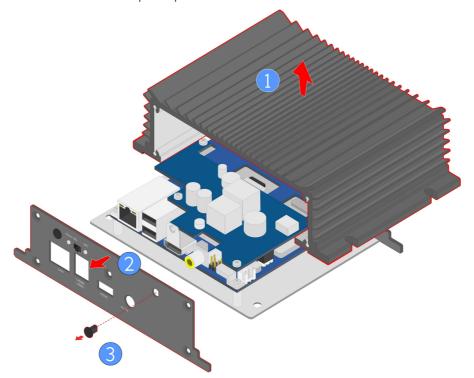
Removing the top cover chassis, back panel plate, and antenna hole cover
